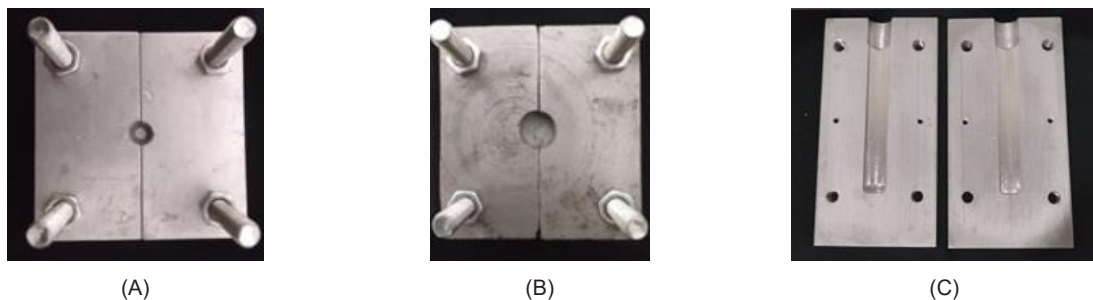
(A) The A-mold (B) The B-mold (C) The C-mold
